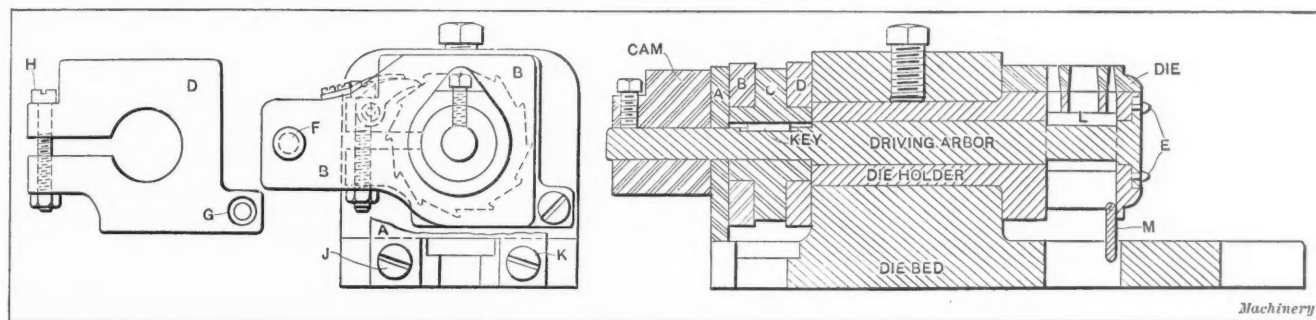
Section of Die Bed, Holder and Arbor for Perforating Shell in Fig. 7
